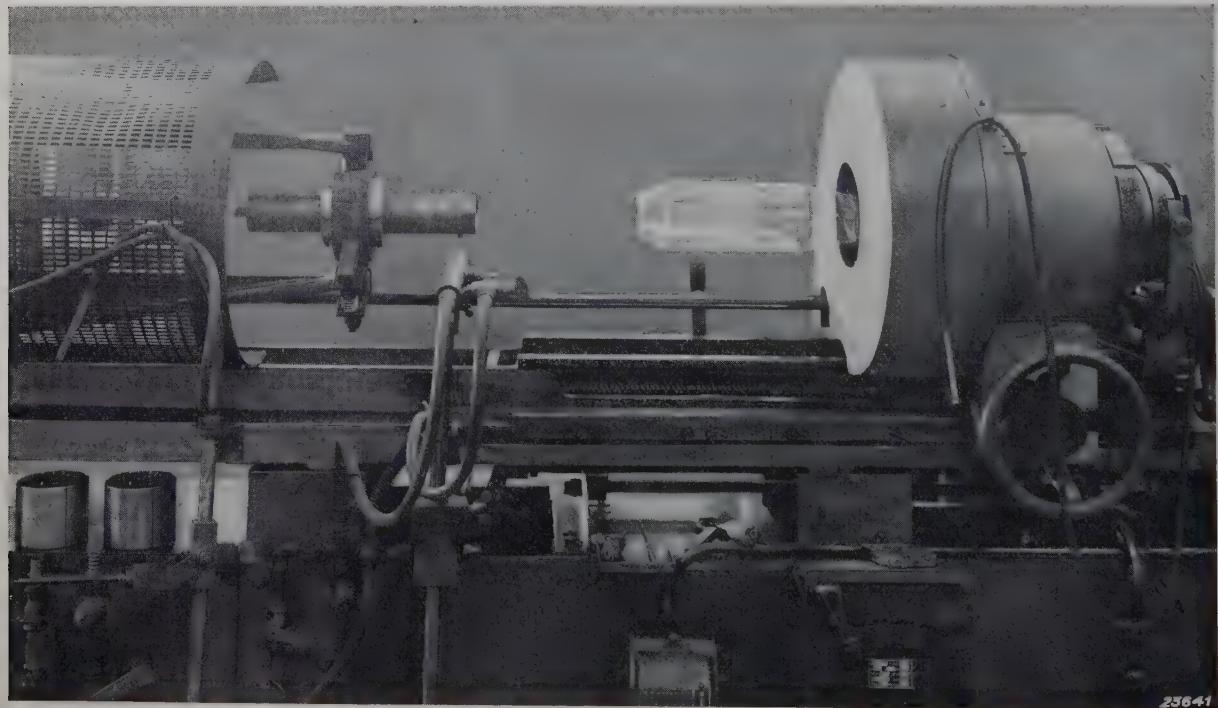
Chrome iron tube with glass bulb (for transmitting valve) on the sealing-in machine.
